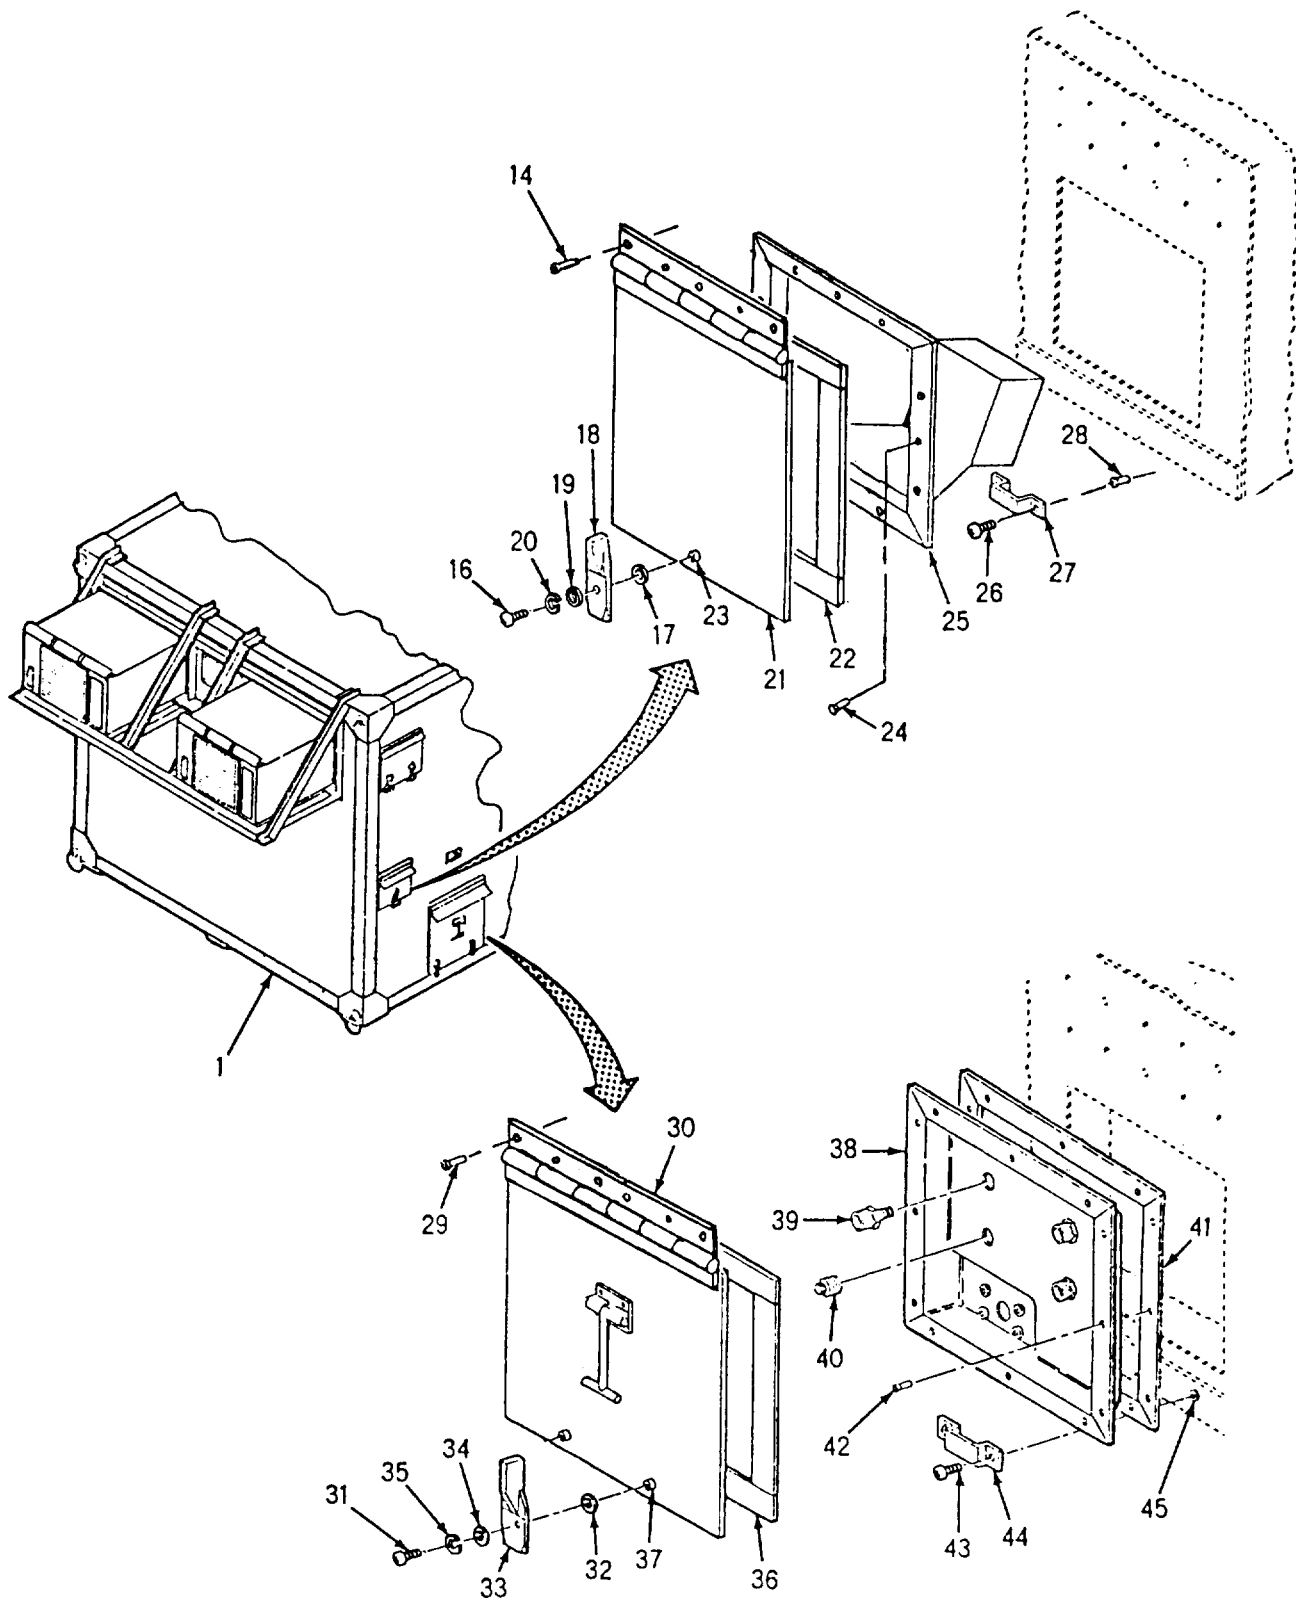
Shelter Assembly (Sheet 2 of 2)
